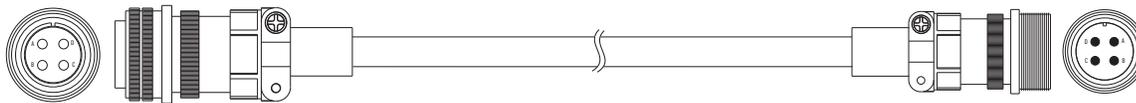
Military-style Power/Brake Connector (extension) Cable Examples
